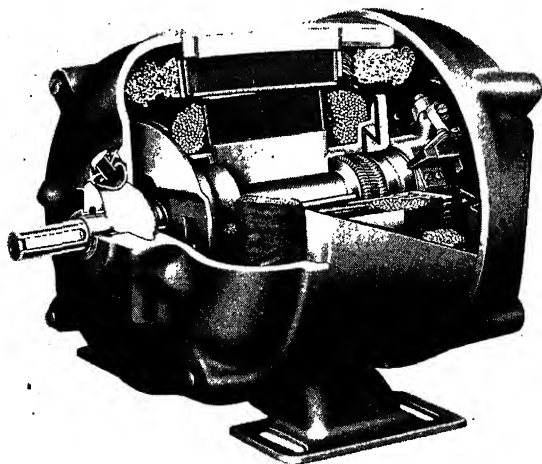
Sectional view of repulsion-induction motor, single-phase. (*Courtesy of Century Electric Company.*)
